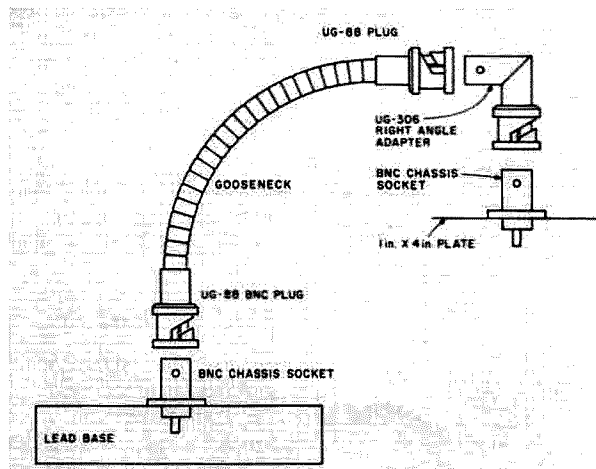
Simple assembly of the holder using BNC connector hardware.
